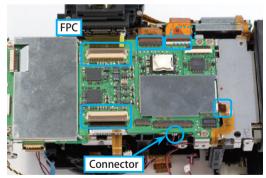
Position of Main PCB Ass'y FPC and Connector
